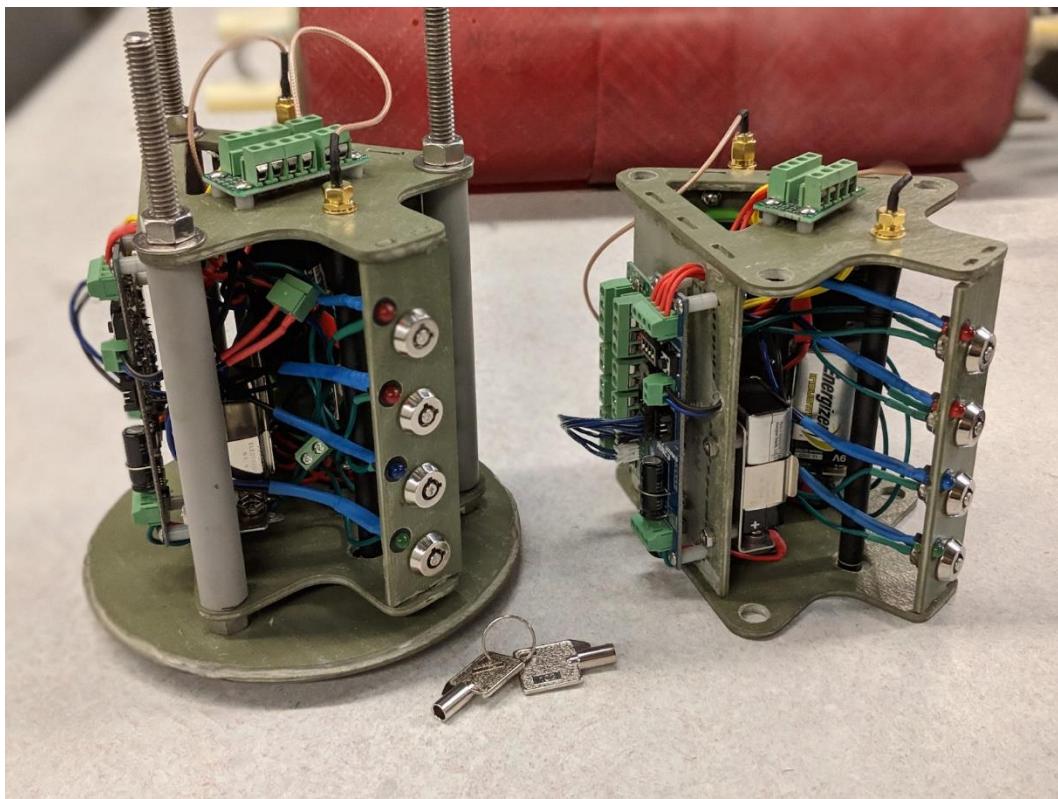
As-built upper (left) and lower (right) avionics sleds, both on and off the threaded mounting rods.
